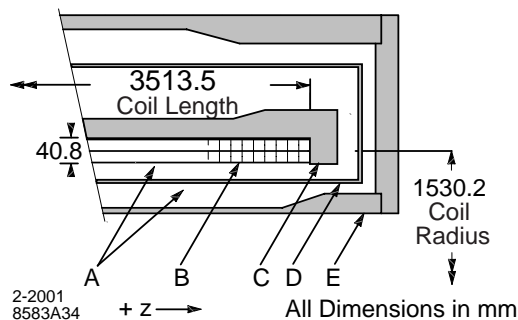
A portion of cryostat assembly. The forward end is shown. Legend: (A) evacuated spaces filled with IR-reflective insulator; (B) superconducting coil (2-layers); (C) aluminum support cylinder; (D) aluminum heat shield; (E) aluminum cryostat housing.
